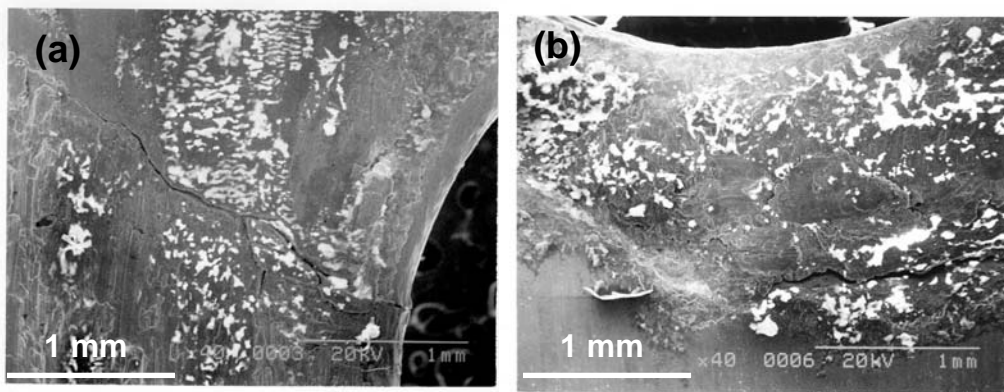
SEM photographs of contact surface of bolted specimen. (a) mechanical fatigue crack, (b) fretting fatigue crack.
